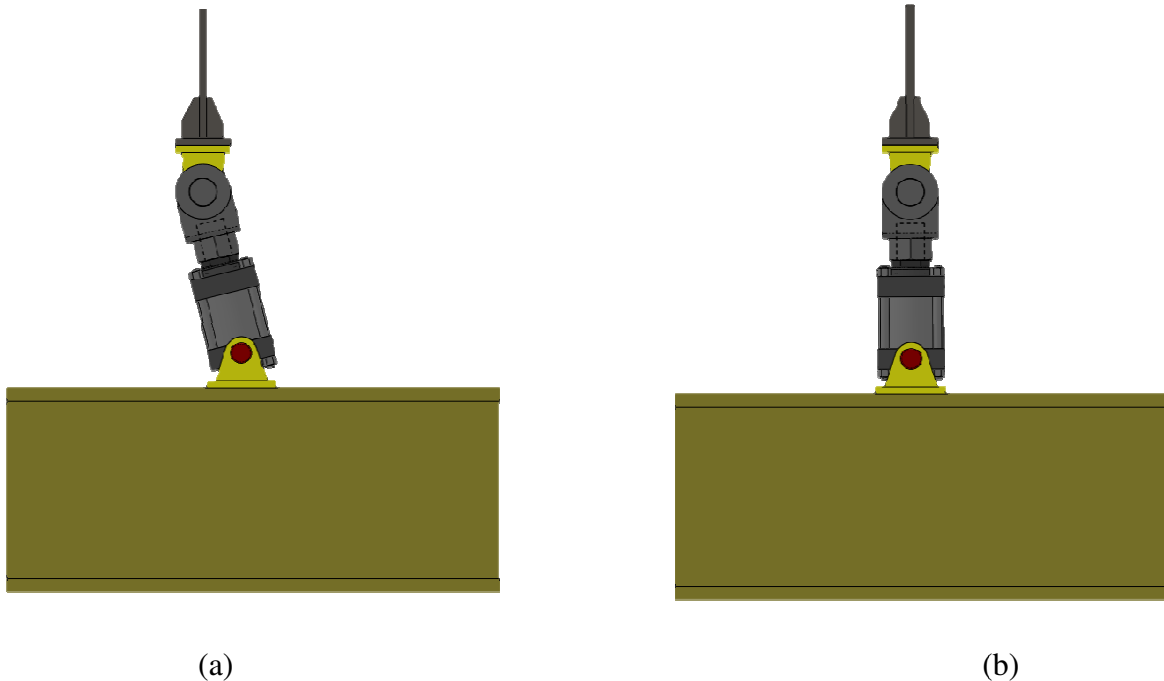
(a) Shows the initial setup of the mount. It would start out angled so that as the engine starts heating up, it would be able to expand into the final position shown in (b).
